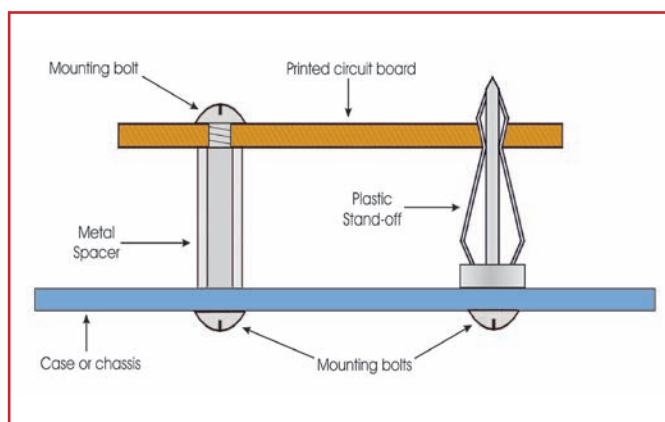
Some stand-offs use mounting bolts at both ends (left), and are much the same as threaded spacers. A common variation on this (right) is to have the stand-off bolted to the case, with the circuit board just clipped into place
